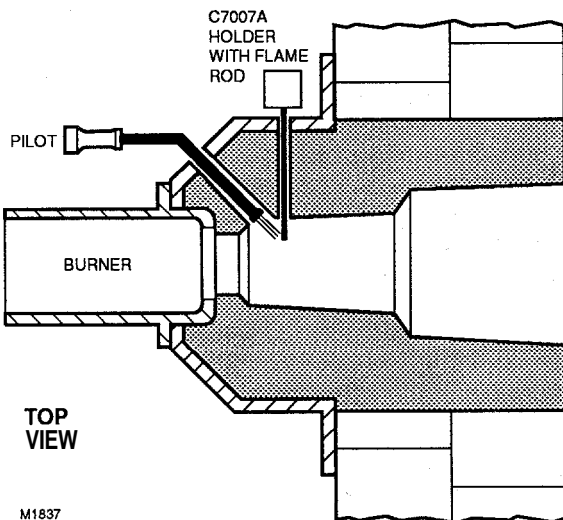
Flame rod installed in cool combustion area of industrial burner.
